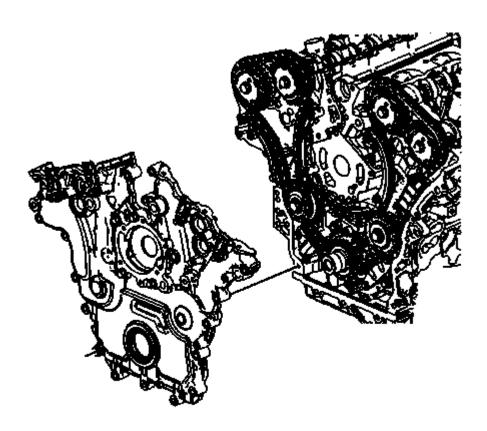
View Of Engine Front Cover Courtesy of GENERAL MOTORS COMPANY
